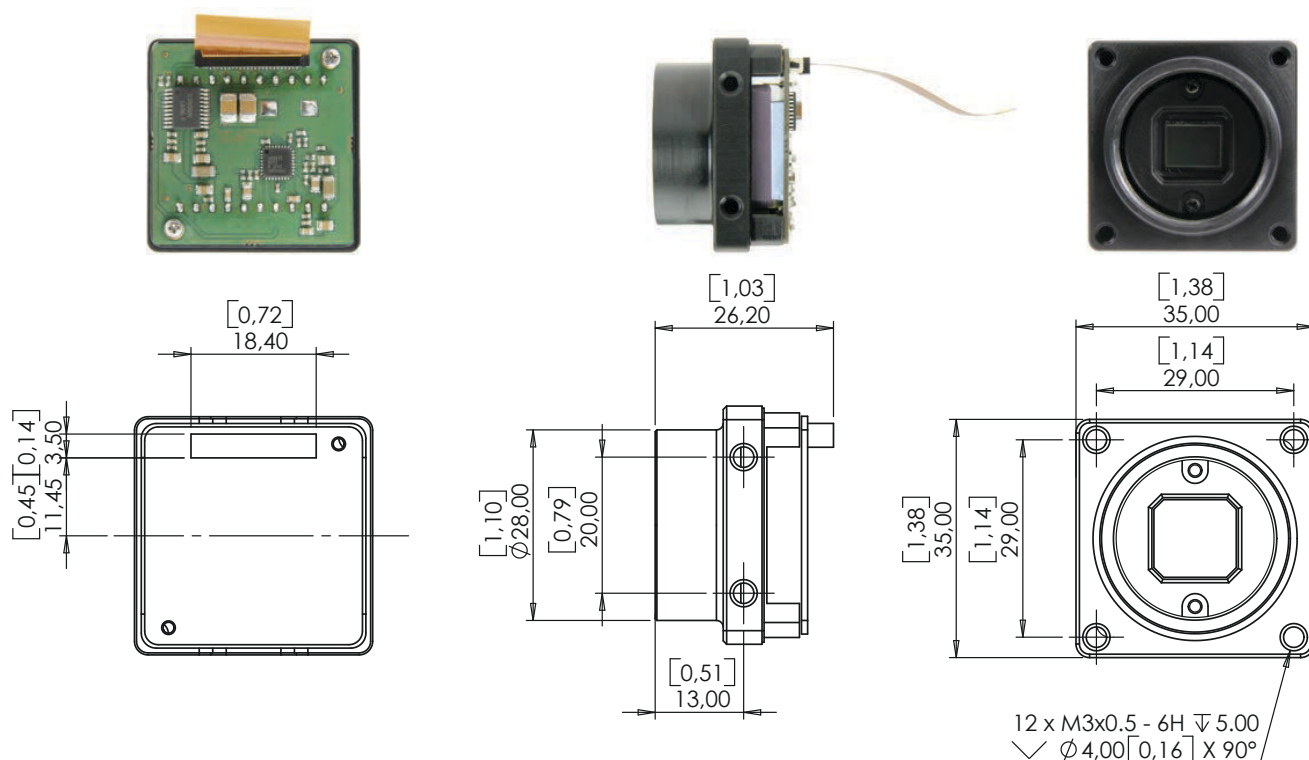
Technical measures of board level sensor head (all dimensions are in mm [inch])
